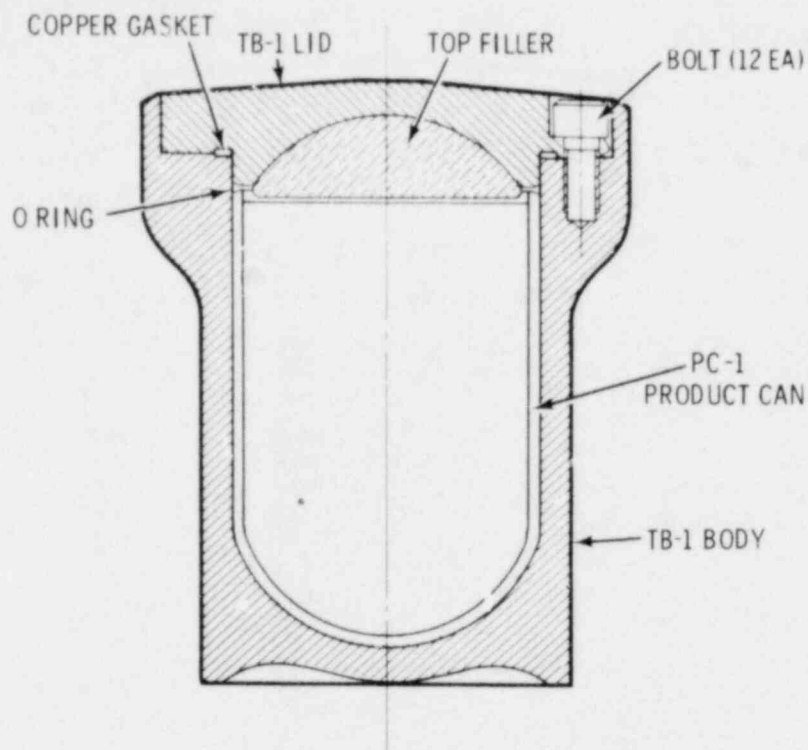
Cutaway Drawing of TB-1 Containment Vessel
